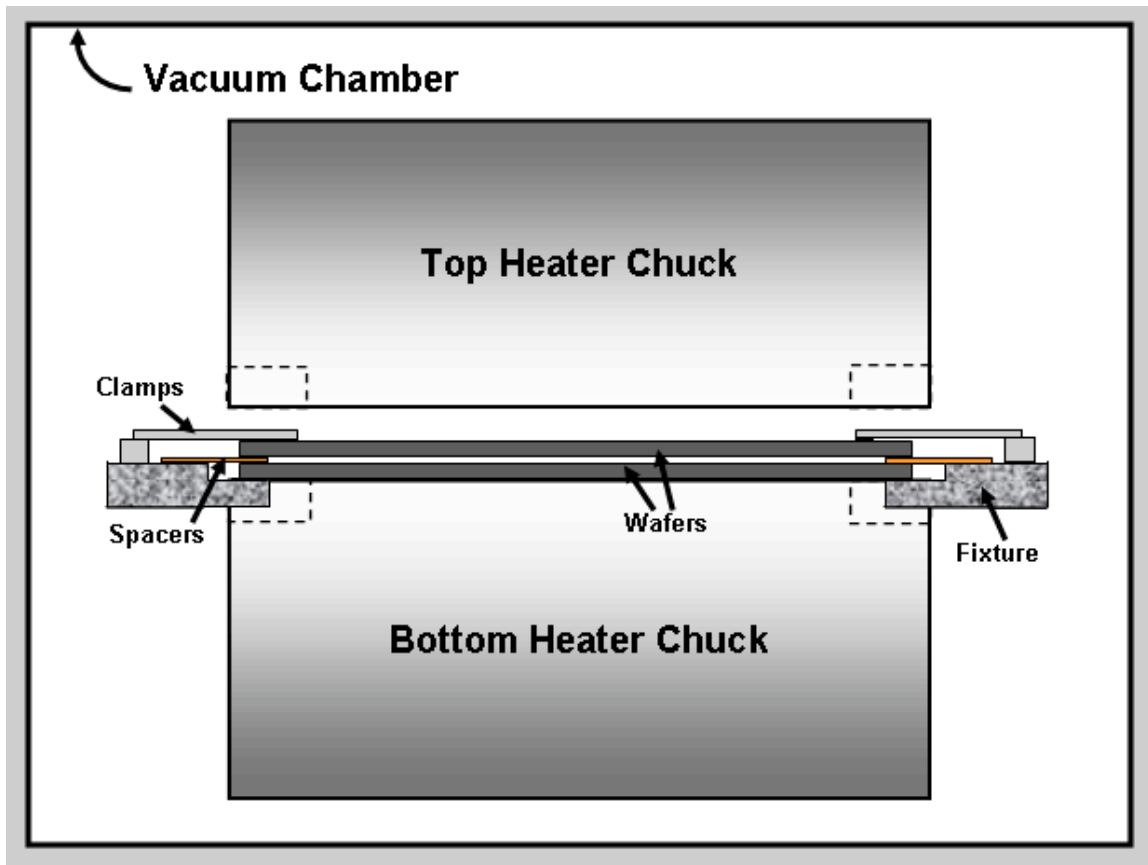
A schematic of the vacuum bond chamber where initially the wafer position is maintained using clamps and held apart with spacers.
